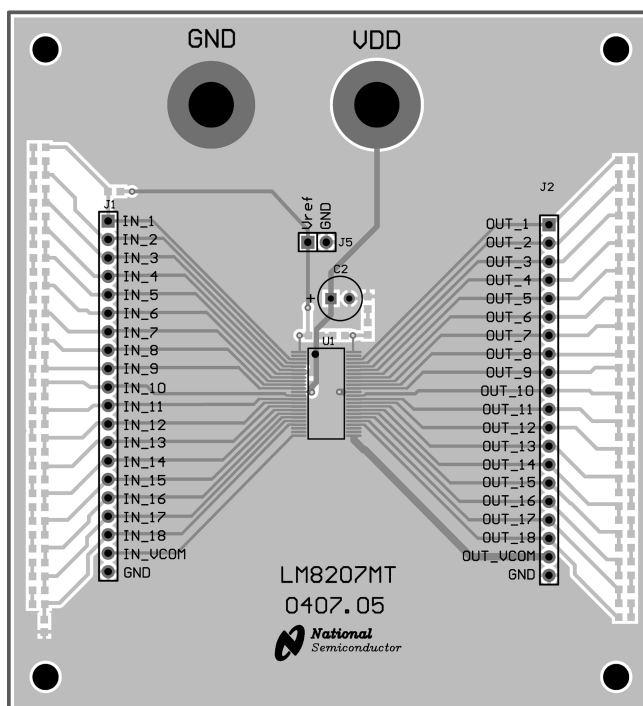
Layout of LM8207 Evaluation Board (Actual Size) — Top View
